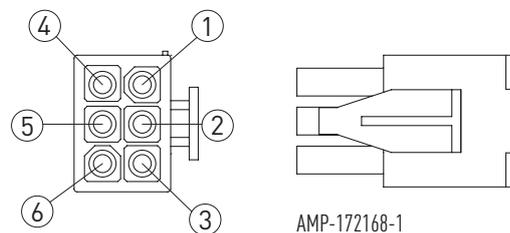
Connector assignment with brake, motor connectors for 50 W – 750 W motors
